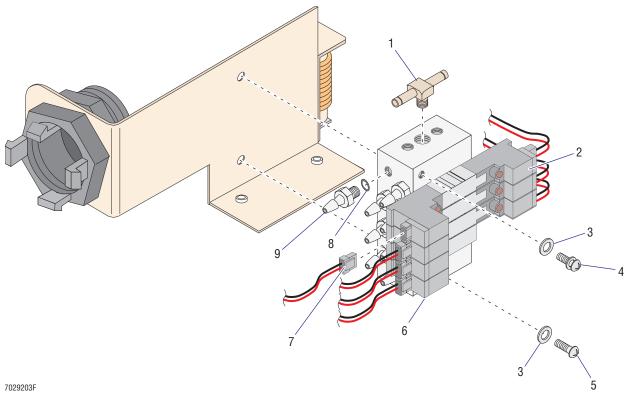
Solenoid Manifold, Lower Pneumatics Drawer (See Table 8.2-39)
